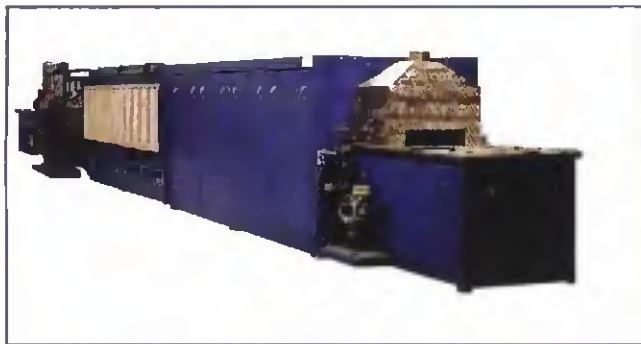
Straight through, continuous belt furnace from Abbott Furnace Co.
